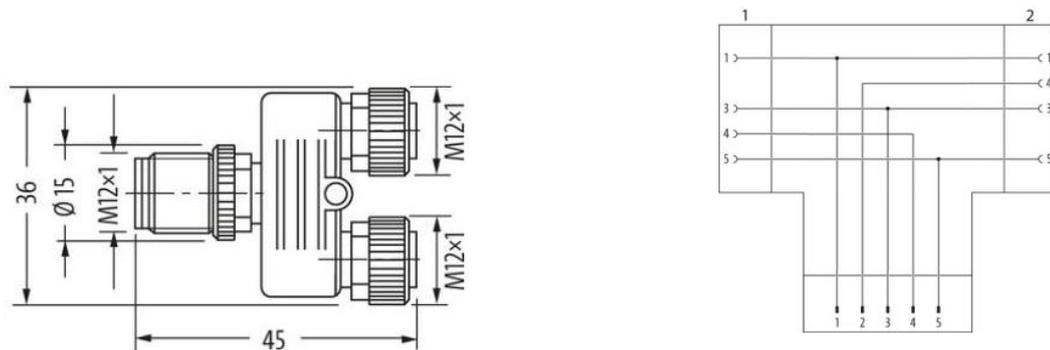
mechanical dimension and wiring diagram Y-connector
